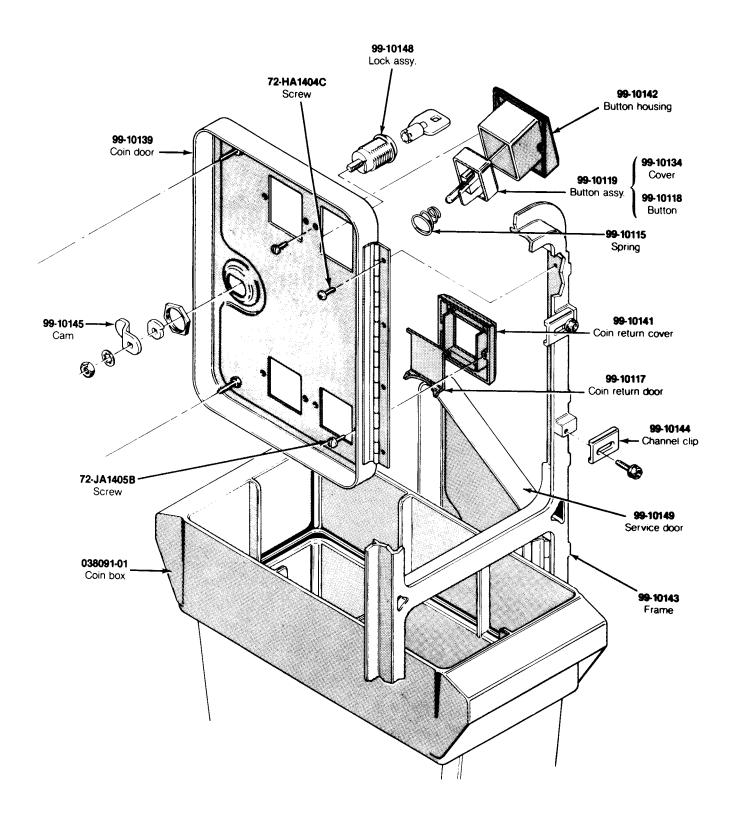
American-Made Coin-Door Assembly, continued 171027-001 A
